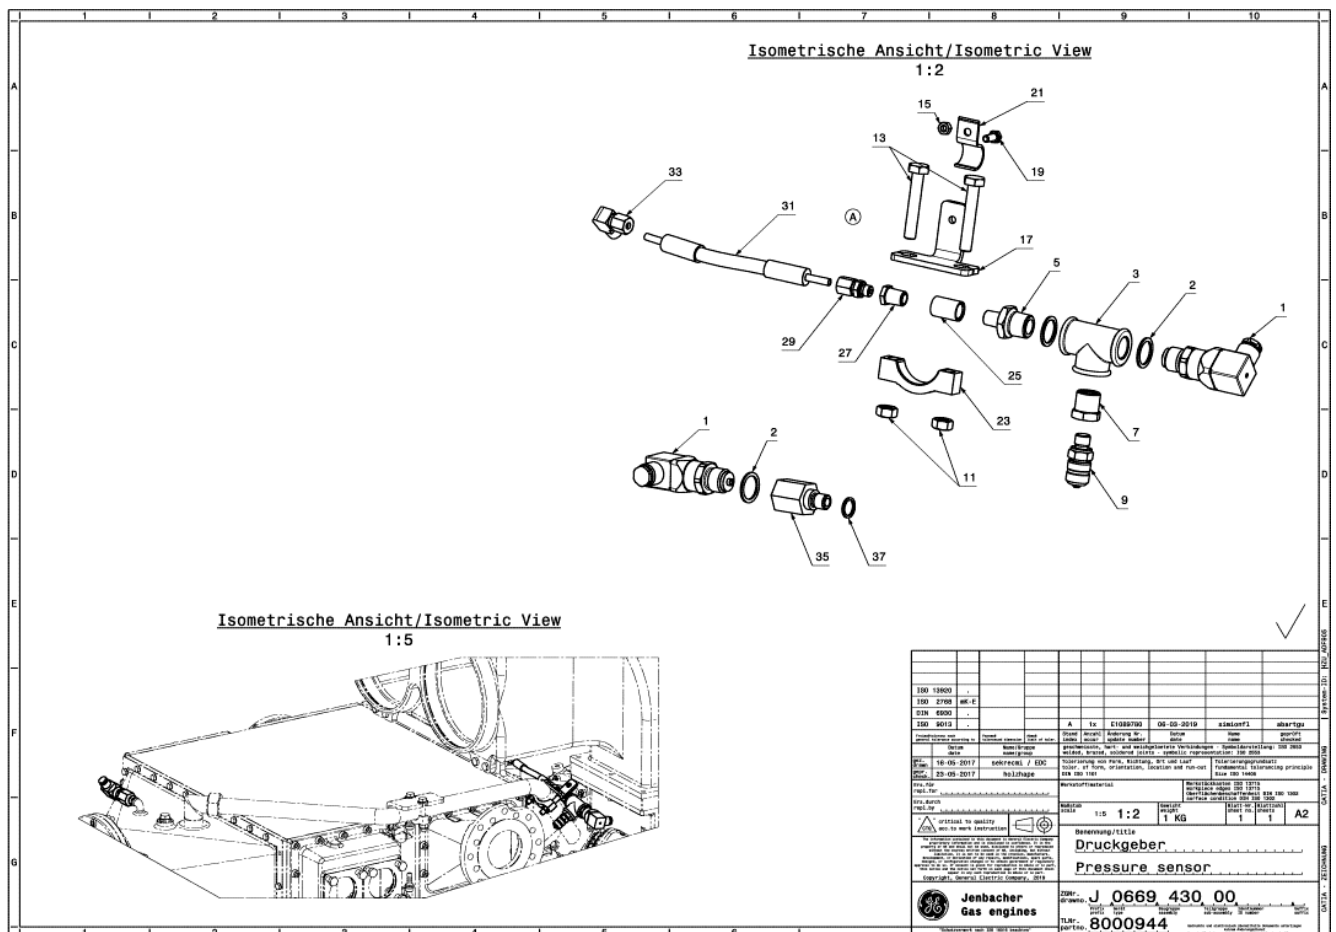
Drawing – Mixture cooler differential pressure module – PN8000944
